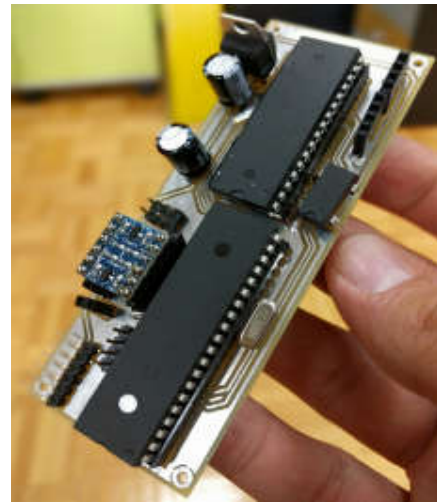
Custom made two-layer PCB for the encoder reading part of the system
